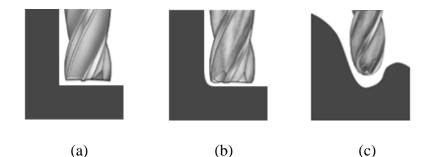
The implication of three type end mill toward the machined surface (a) Flat end mill (b) Bull nose end mill (c) Ball nose end mill Source: http://www.mcmaster.com/#end-mills/=zujxva
